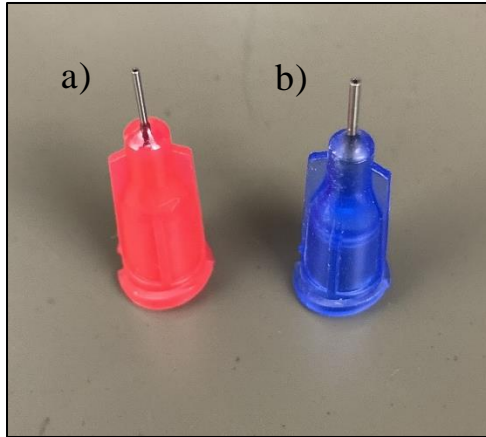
Robocasting nozzles: a) Red tip with a 250 μm diameter nozzle and b) Blue tip with a 410 μm diameter nozzle.
